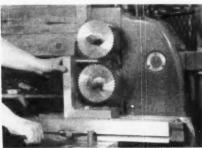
, 6, 7, and 8, Various machining operations being performed on Nichols-Morris hand millers: drilling, boring, turning, grinding.
